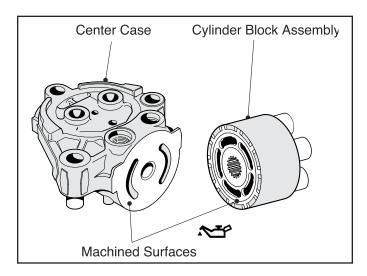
, Machined Surfaces–Center Case/Cyl. Blk
